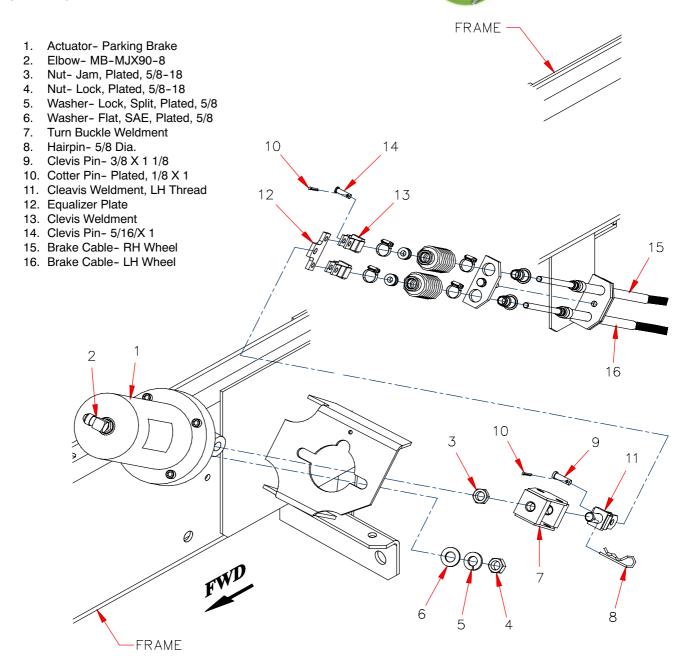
A The Parking Brake Actuator is located in front of the left rear fender. Do not cut into, disassemble or torch the canister. The spring is under compressed force. The actuator canister must be replaced if a failure occurs.
